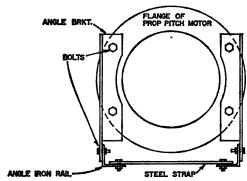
Side view of the rail-mounted differential and plate on the axle can mate properly with the studs on the brake assembly, and the housing can be welded to the differential housing. Fig. 1 will probably make this more clear than the verbal description. After the axle has been fitted and the housings welded to each other, the brake drum can be slipped over the studs and fastened onto the axle plate with the two or three original screws. The studs are now in place, ready for insertion into the holes on the proppitch drum.
